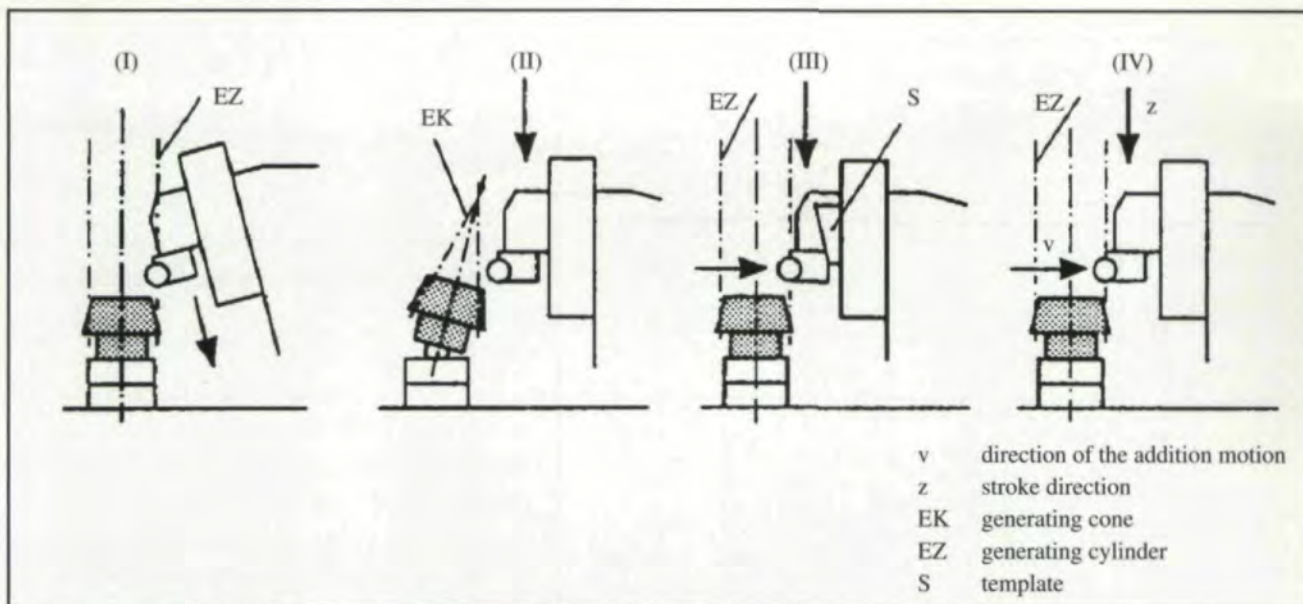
Four possibilities for grinding bevel gears on a cylindrical gear grinding machine.
